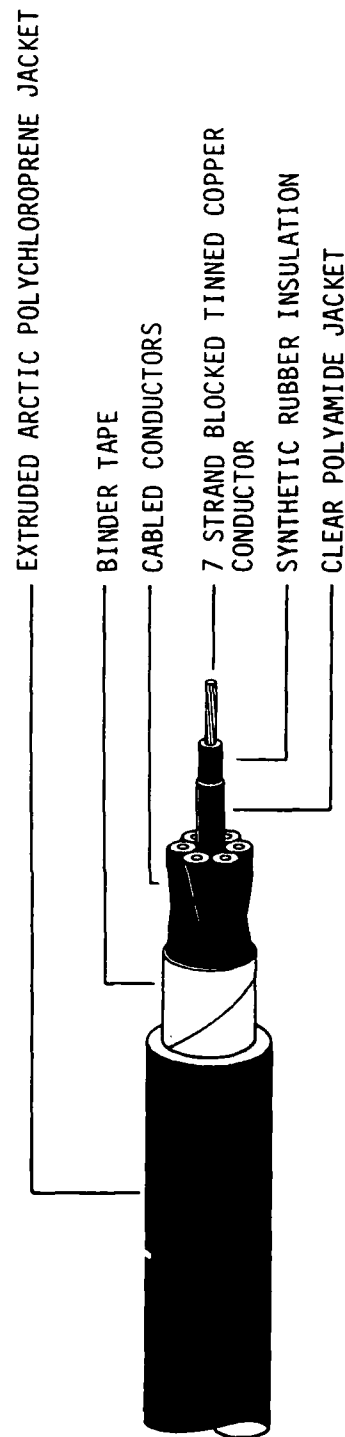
MIL-C-915 MWF TYPE CABLE CONSTRUCTION
